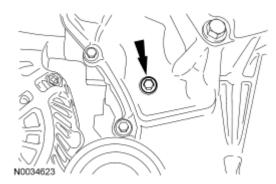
Locating Lower Front Cover Timing Hole Plug Courtesy of FORD MOTOR CO.
